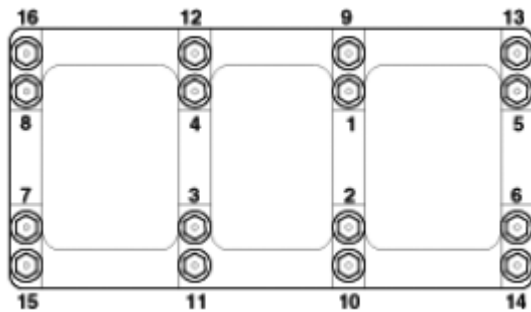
Identifying Bearing Cap Bolts Tightening Sequence
